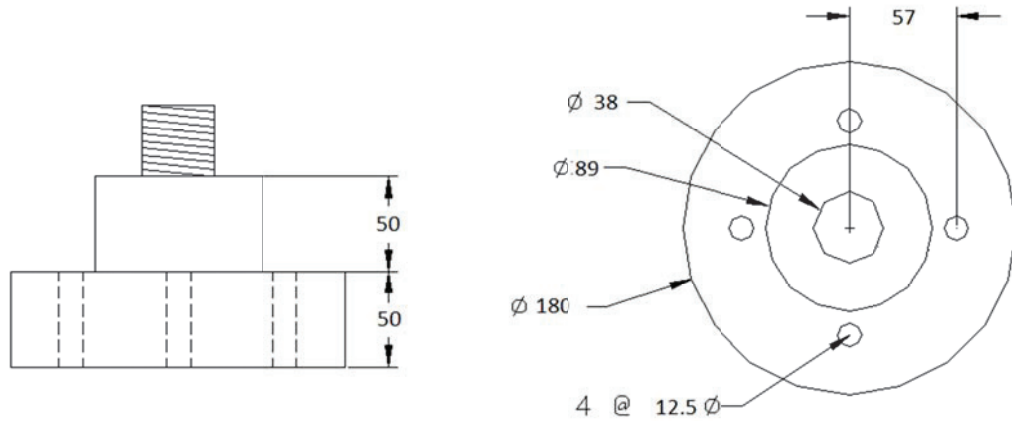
Schematic of the top testing fixture (dimensions in mm)
